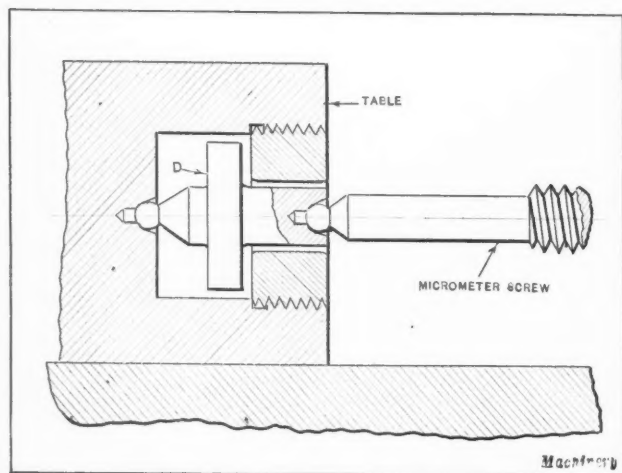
Construction of the Micrometer Screw and Thrust Pin in the Toolmaker's Microscope shown in Fig. 4
